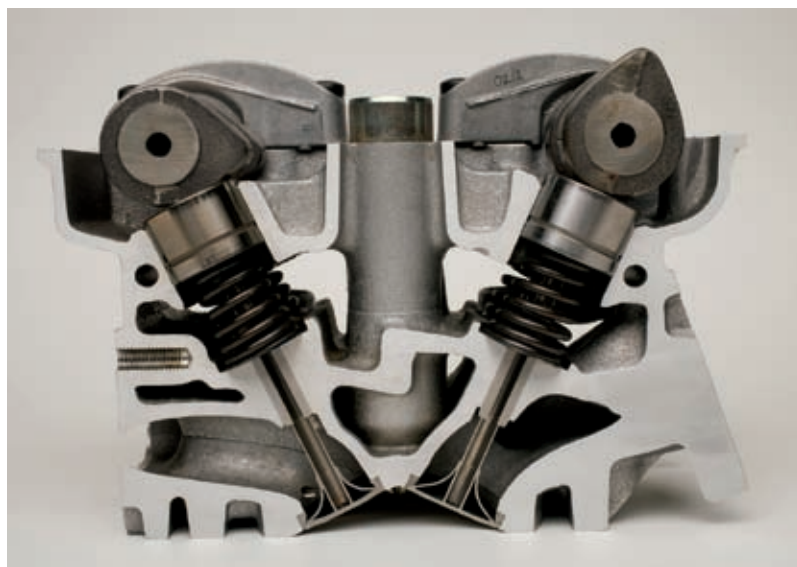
Cylinder head of a DOHC engine with two separate camshafts
